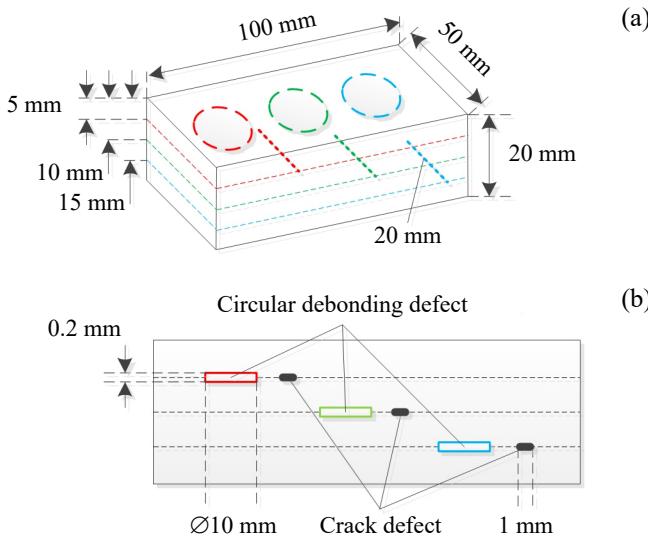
CFRP test piece and defect structure design. (a) CFRP test piece 3D structure. (b) Defect size and location.
